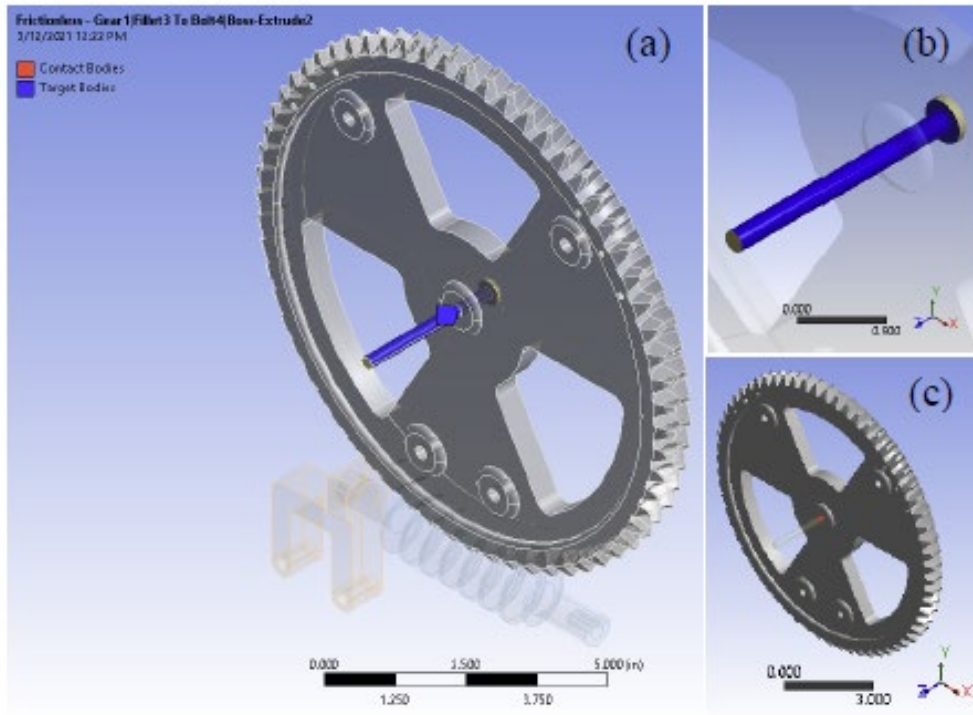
Worm gear simulation: (a) frictionless contact type between the bolt and the gear shaft hole, (b) bolt contact body view, and (c) gear shaft hole contact body view.
